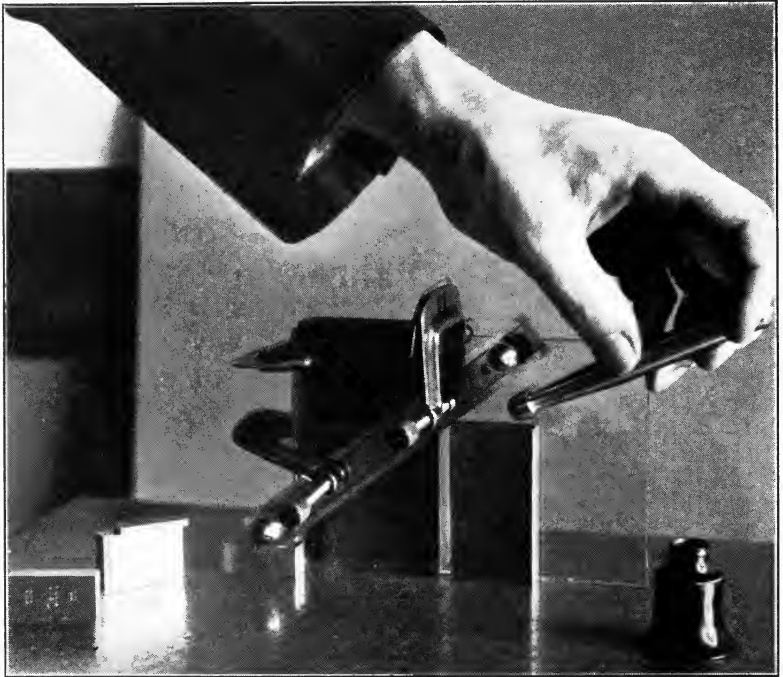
Set-Up of Johansson Blocks for Checking Taper of a Special Plug Gage
